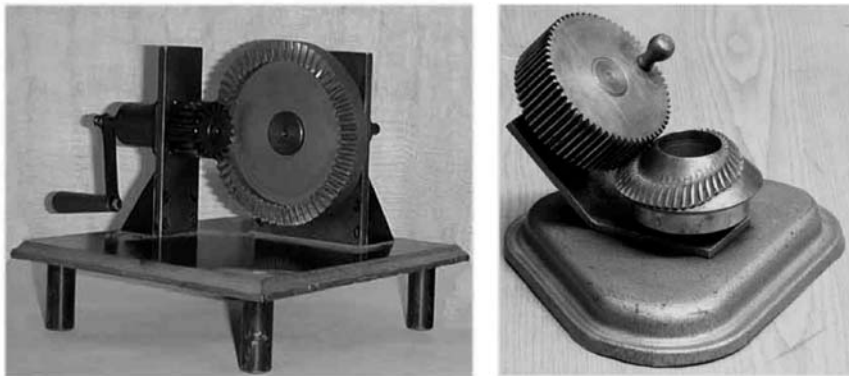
Models of “non-involute” conical gearings with screw motion of output link (left side) and with variable reduction ratio (right side)
